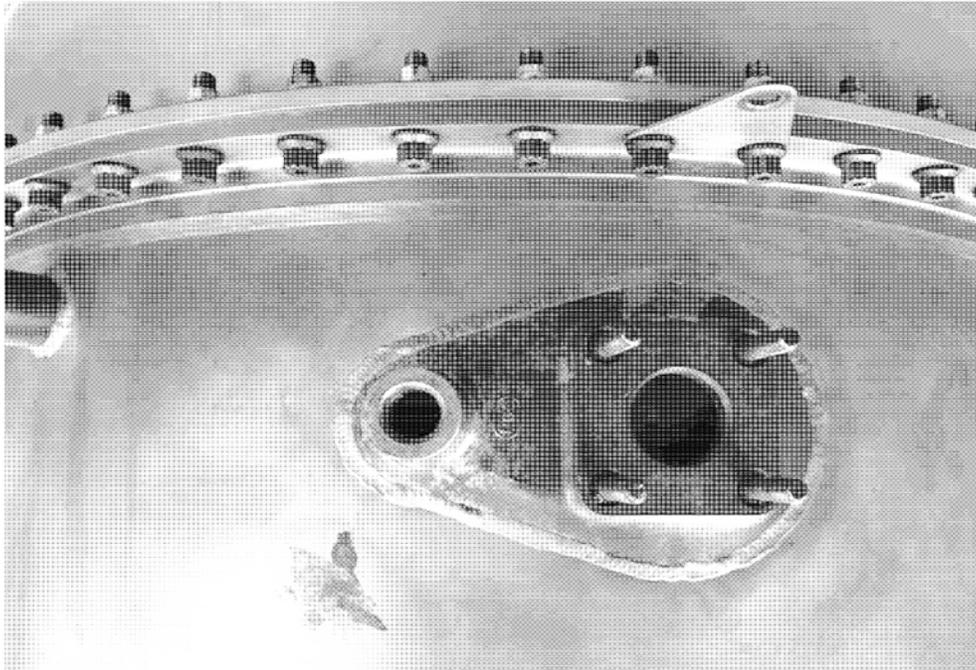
to Paragraph (h) of this AD. Combustion Chamber Case Assembly with One-Piece Bleed Pad with P3 Boss
